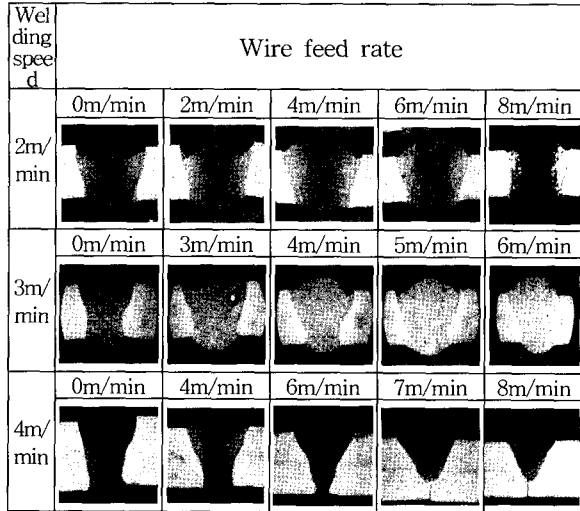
Cross section of the weld beads with different wire feed rates
